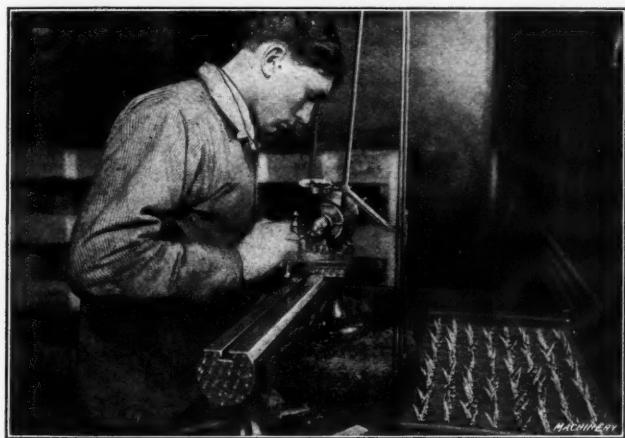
Turning Valve Needle Points in a Hardinge Bench Lathe
